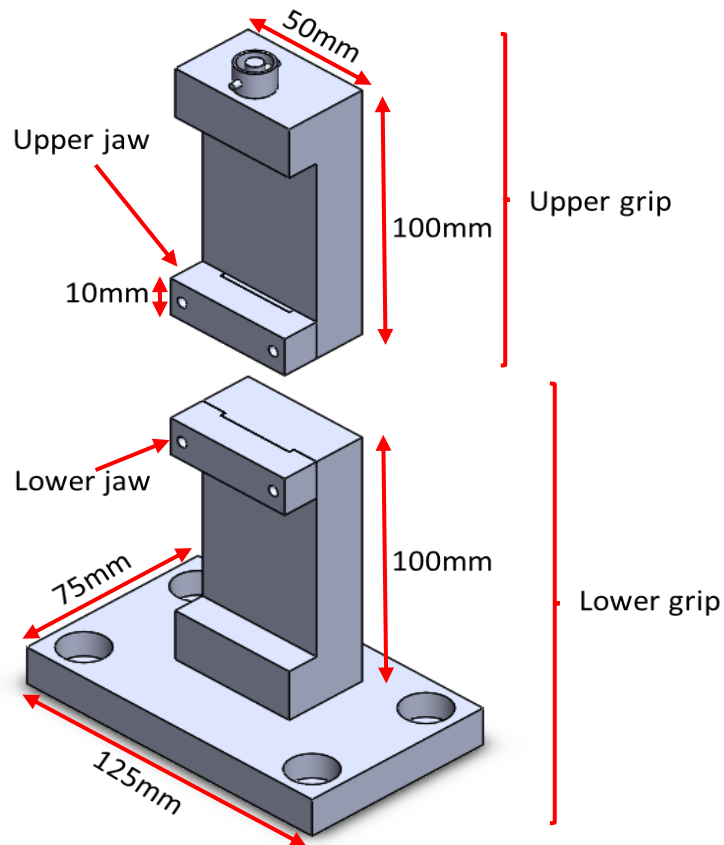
Design and dimensions of tensile testing fixture [47]
